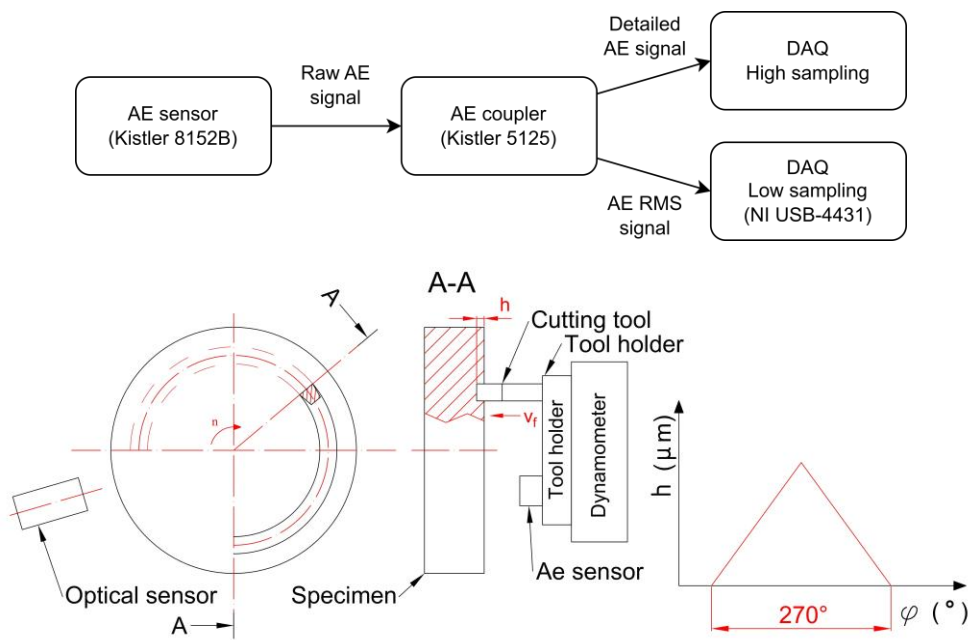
A typical measurement setup for AE in machining (above), Experimental setup (below)
